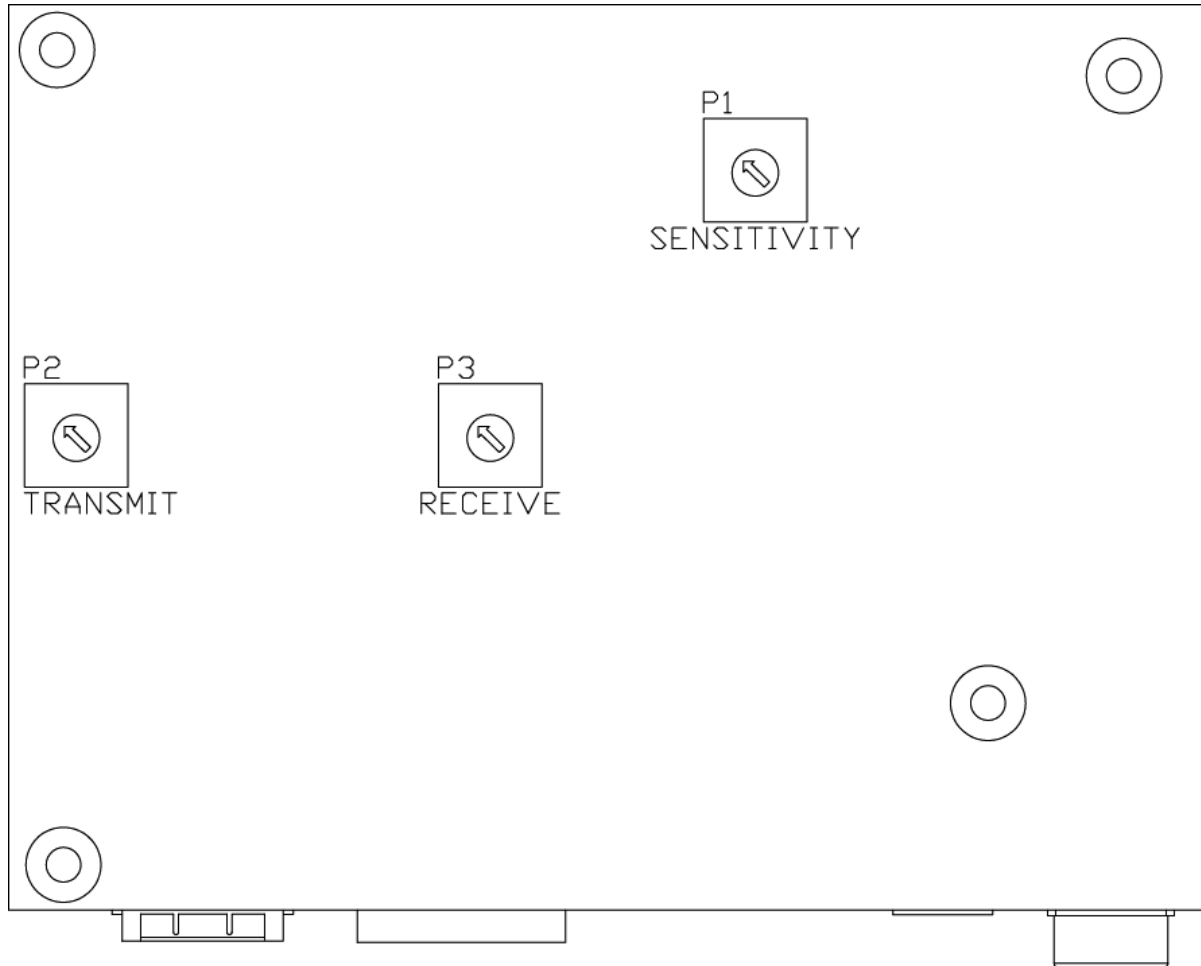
MAIN CIRCUIT BOARD, BOTTOM VIEW
